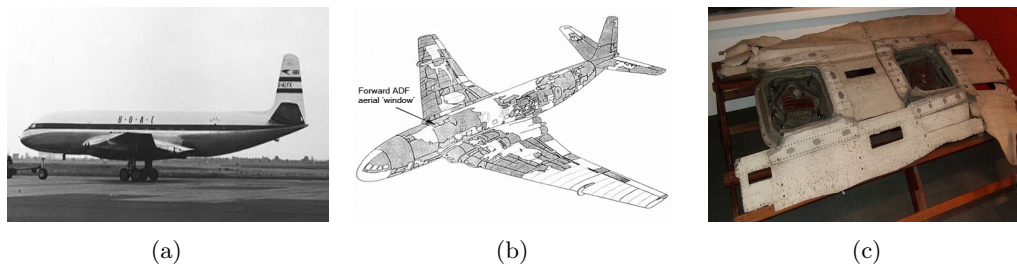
BOAC Flight 781 Crash pictures (a):DH Comet 1 BOAC Heathrow 1953, before take-off [2]; (b):recovered wreckage assembled digitally depicting fracture initialization point [3]; (c): Picture of wrecked fuselage [4]
